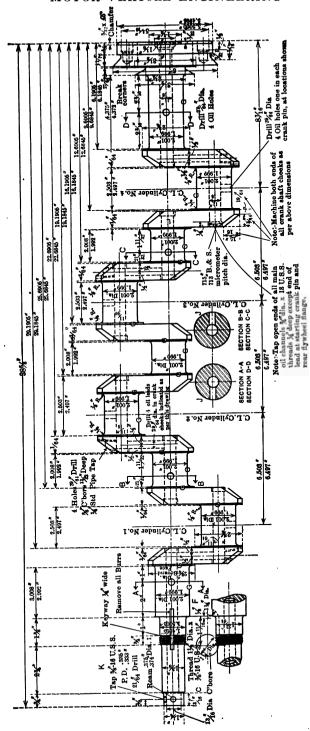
Five-bearing crankshaft of the Hercules, Series M motor (bore from 4" to 41/2", stroke 51/2").
